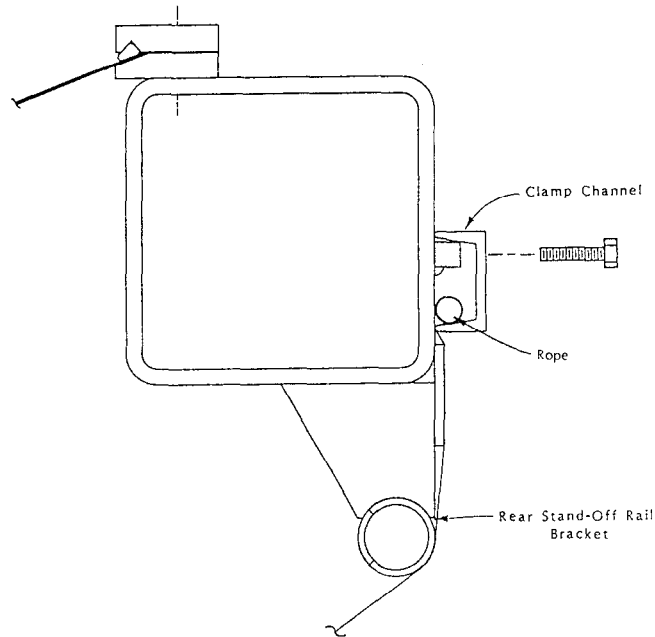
Cross Section of Dish Ring Showing Rear Membrane Clamping Arrangement.
